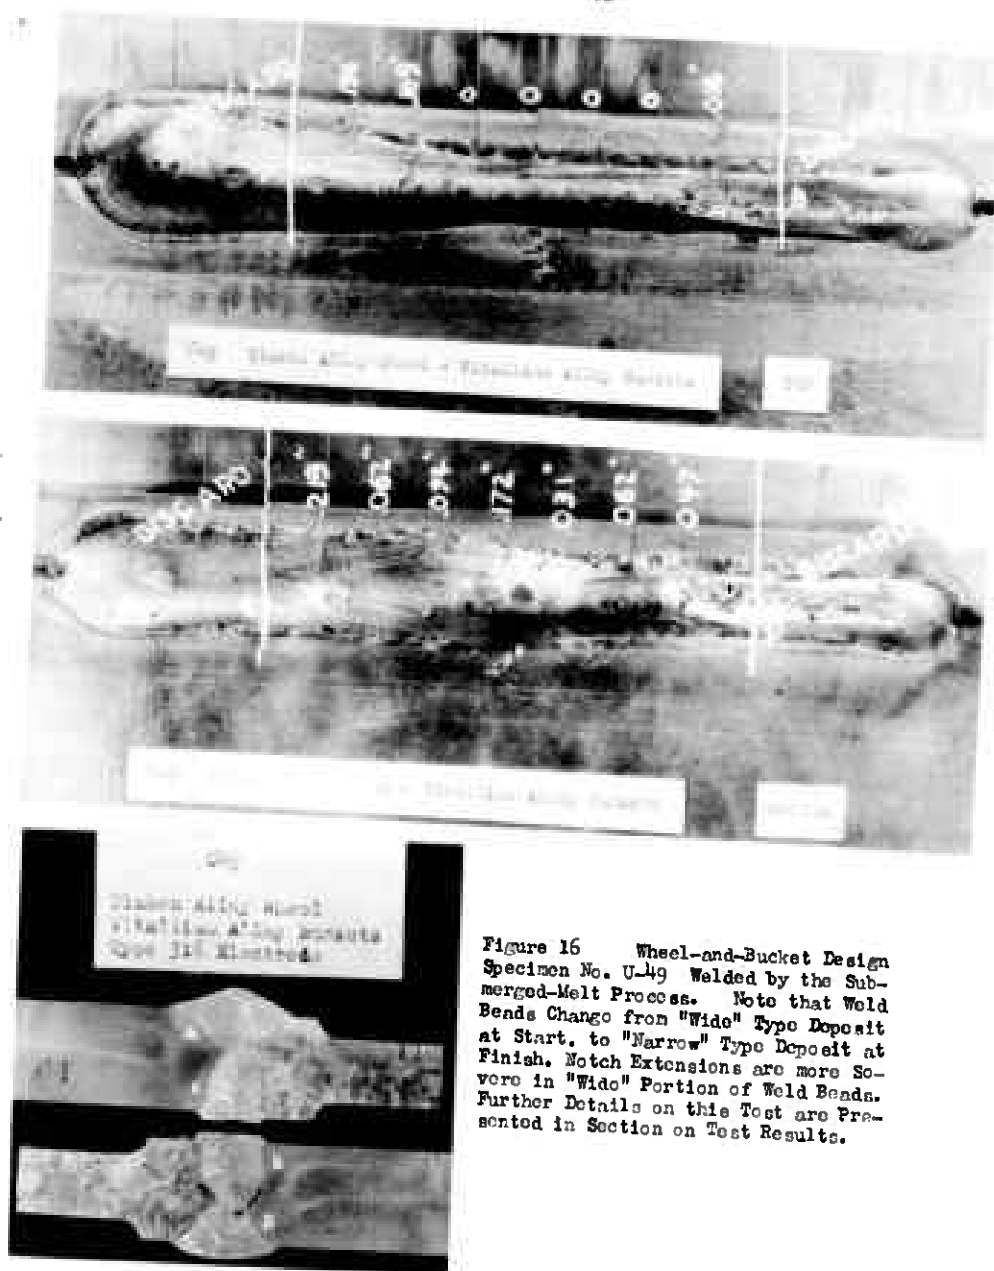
Wheel-and-Bucket Design Specimen No. U-49 Welded by the Submerged-Melt Process. Note that Weld Beads Change from "Wide" Type Deposit at Start, to "Narrow" Type Deposit at Finish. Notch Extensions are more Severe in "Wide" Portion of Weld Beads. Further Details on this Test are Presented in Section on Test Results.
